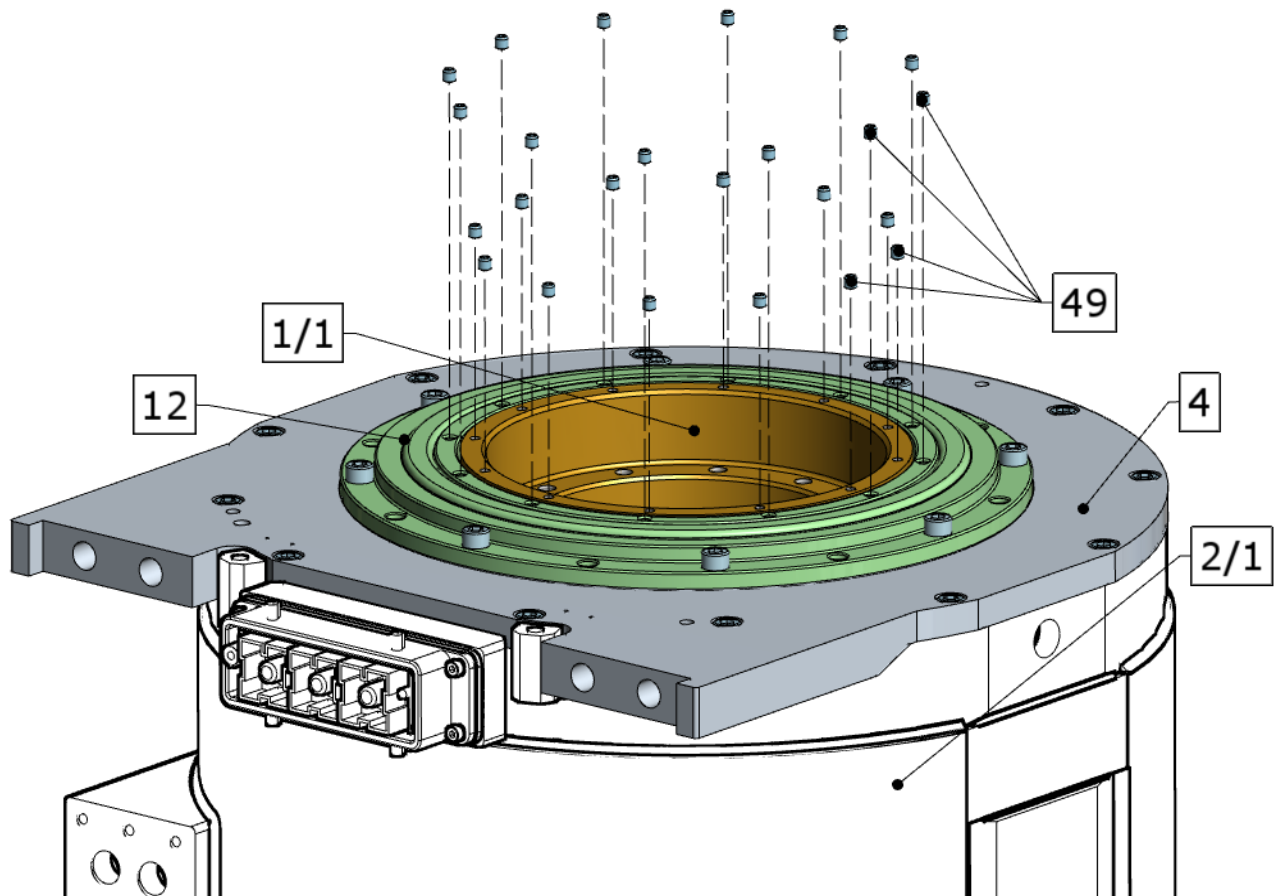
Assembly of adjustment screws (49) into shaft (1/1) and bearing unit (12)
